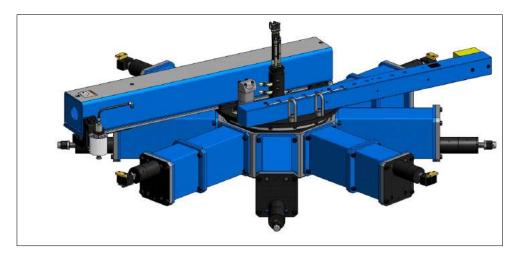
ID MOUNT FLANGE FACER WITH GRINDING HEAD
